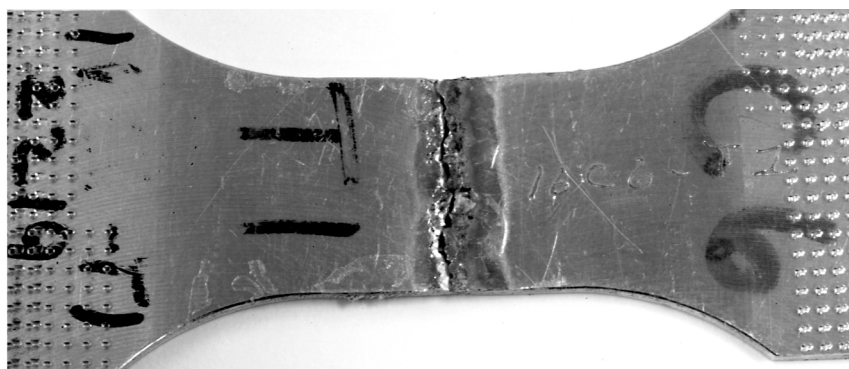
shows a butt weld joint on 304 SS. This fracture appeared clean with no obvious defects. Some ductility was apparent in both the fracture surface and poor fit of the broken pieces.
